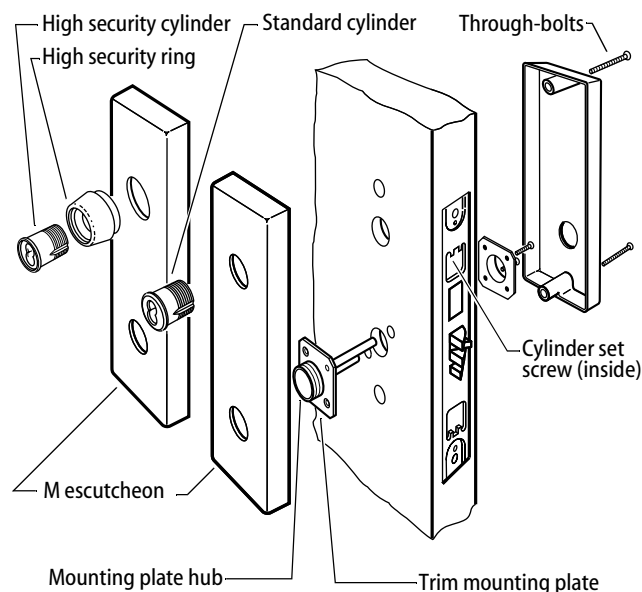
Installing the mounting plates, escutcheons, & cylinders
